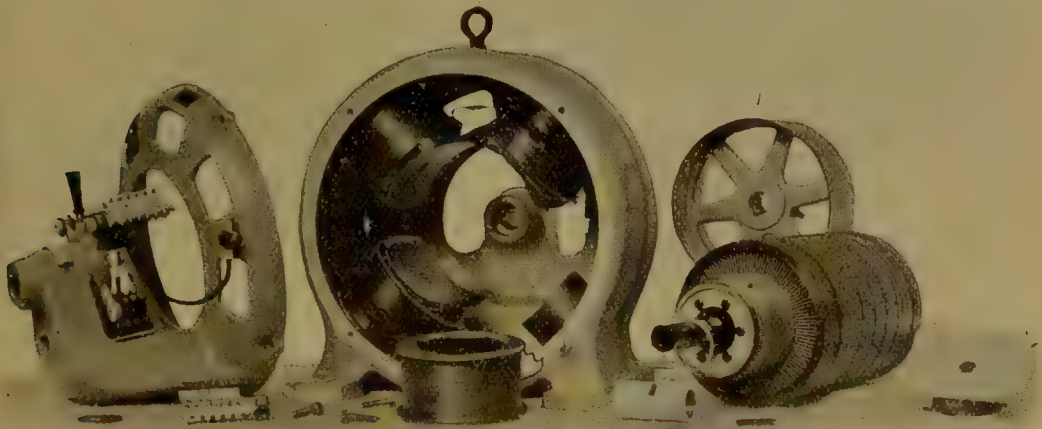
Four-pole Motor of the International Electrical Engineering Company.
